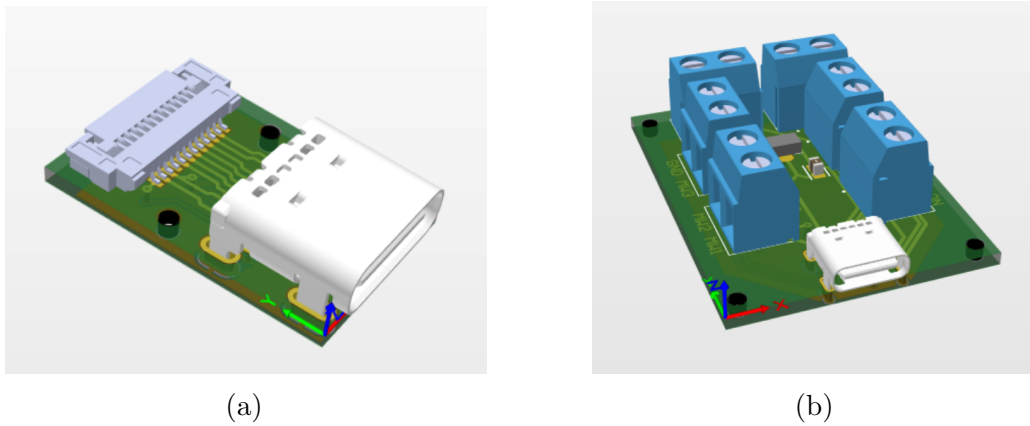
The motor adapter PCB (a) and driver adapter PCB (b).
